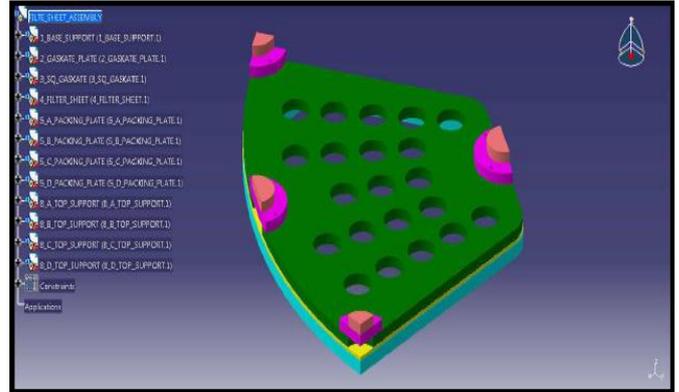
3-D Model of Filter Sheet Plate Assembly
